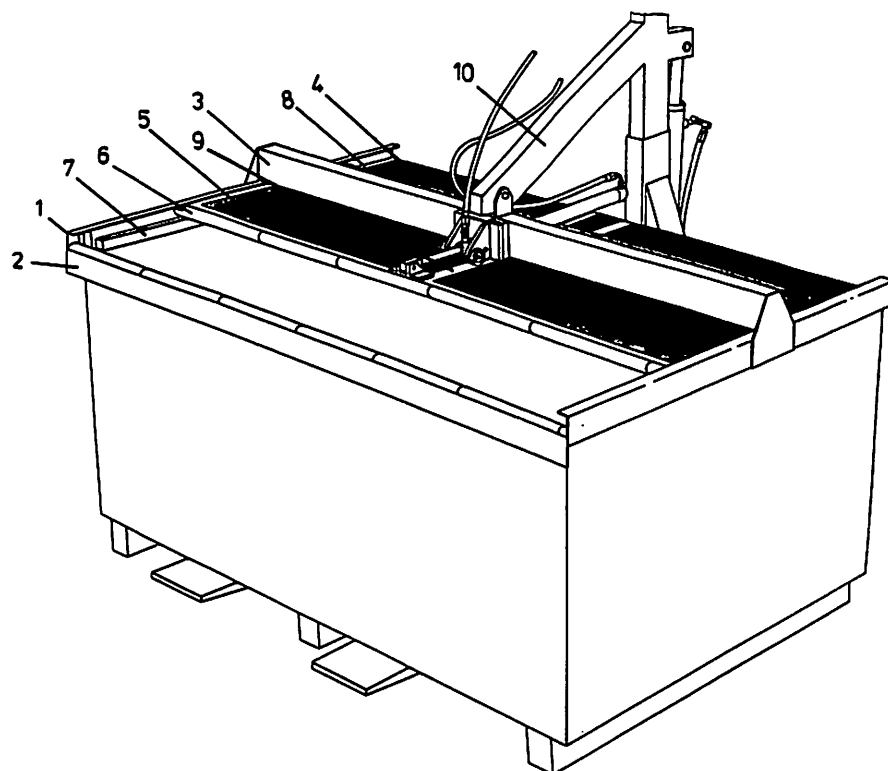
Diagram showing main components of box tipping attachment: 1) channel section steel member; 2) box retaining flange; 3) cross beam; 4) fixed lid; 5) sliding lid; 6) steel front edge; 7) slide rail; 8) static lid slide rail; 9) sliding lid centre rail; 10) clamping bar
